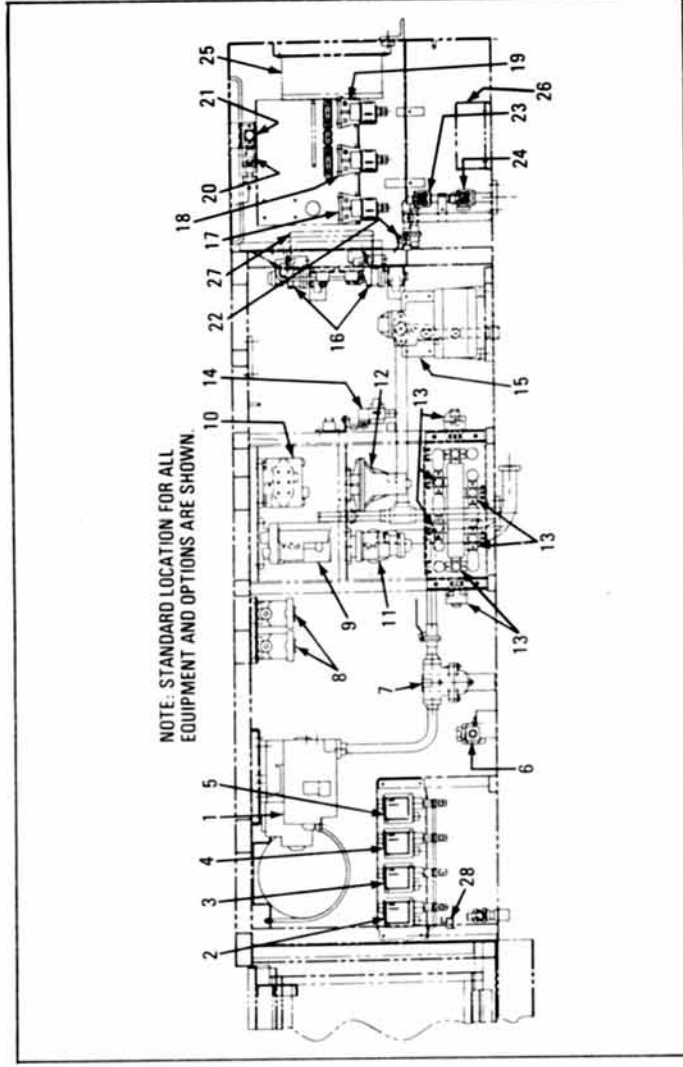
TYPICAL AIR BRAKE EQUIPMENT LOCATIONS.
